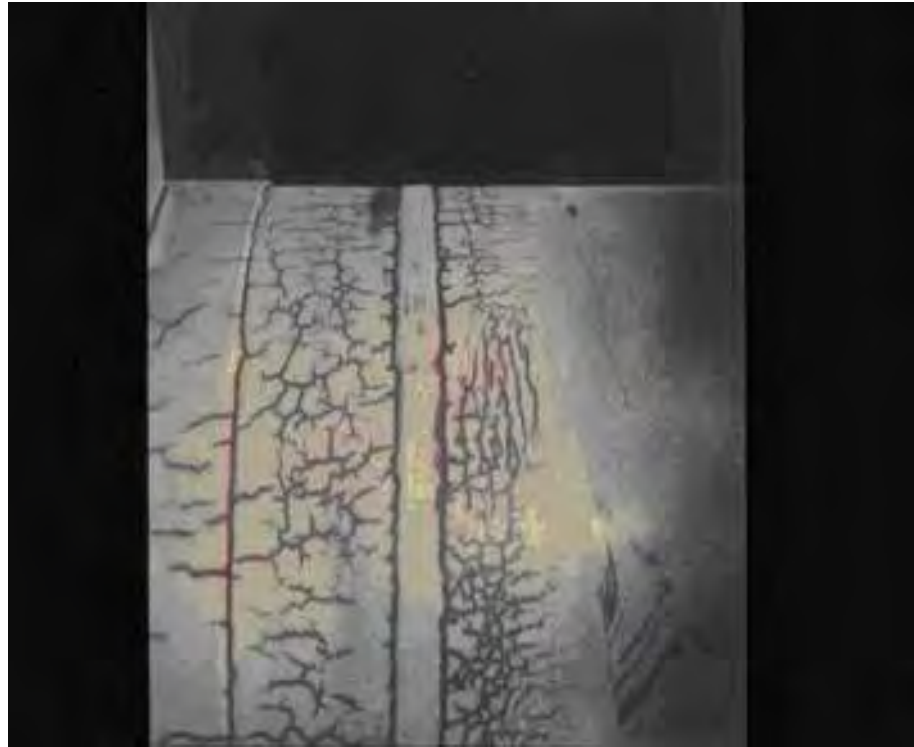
Dye penetrant (PT) inspection showing extensive OD PTA SCC around welds.
